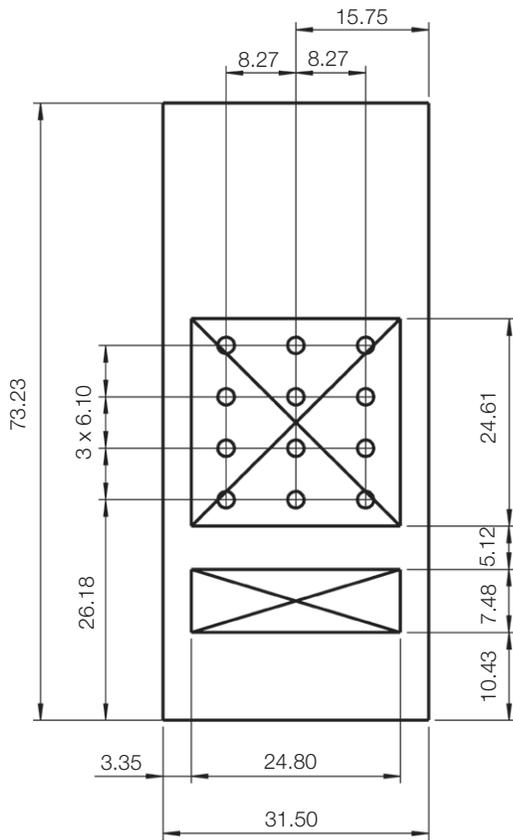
Feeder panel, panel width 33.07 in, dimensions in inches
